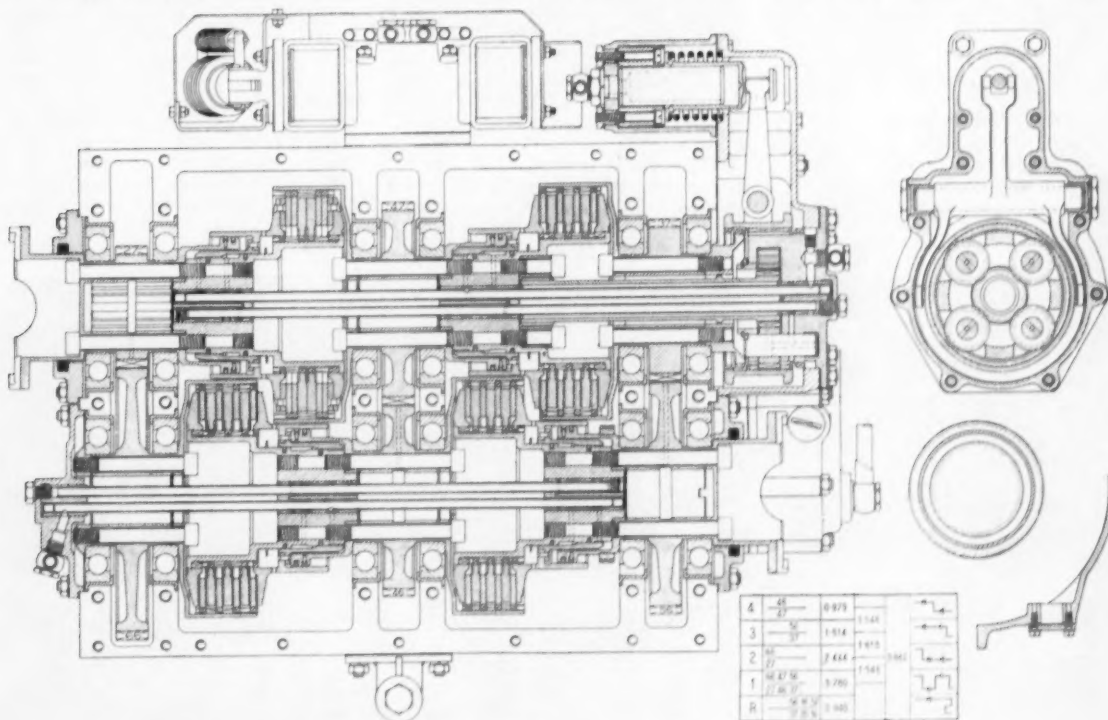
In the four-speed gearbox, oil-actuated multi-plate clutches are incorporated for the selection of the gears
